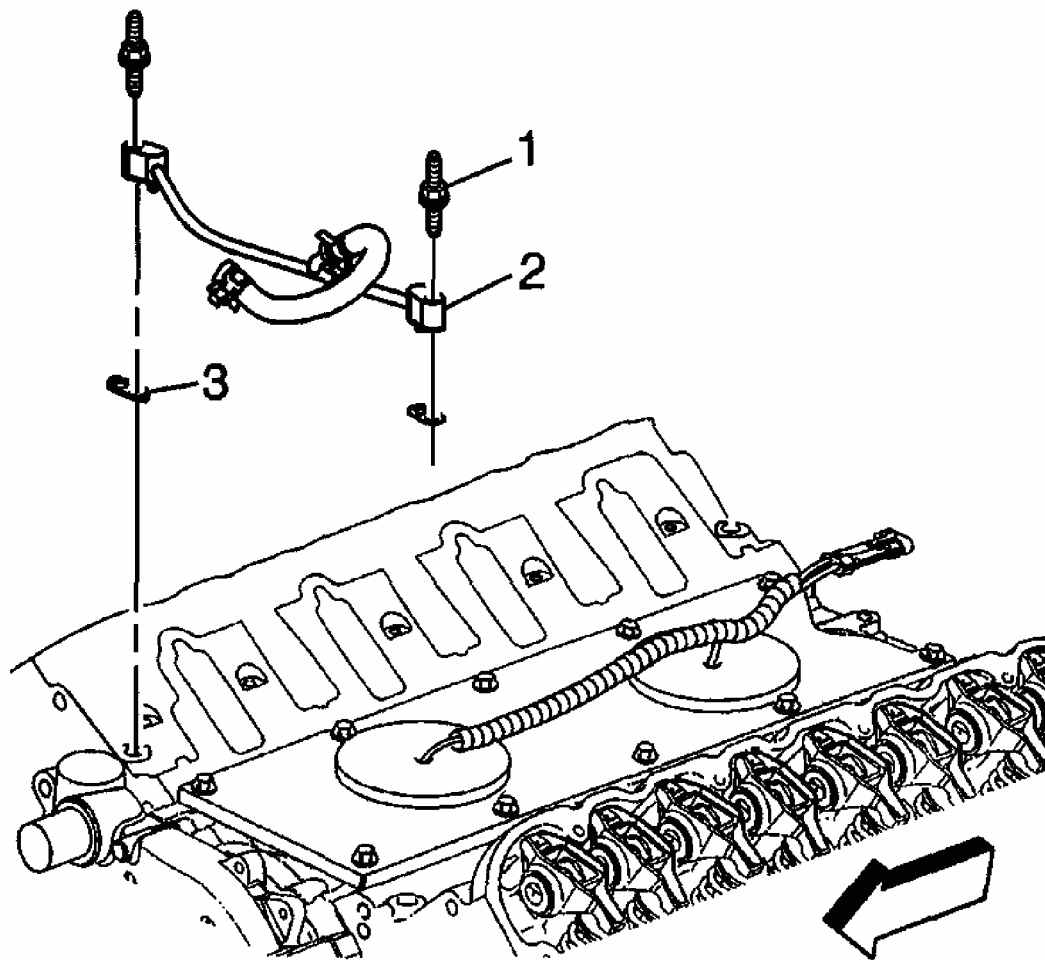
Installing Coolant Air Bleed Pipe Cover Bolts
